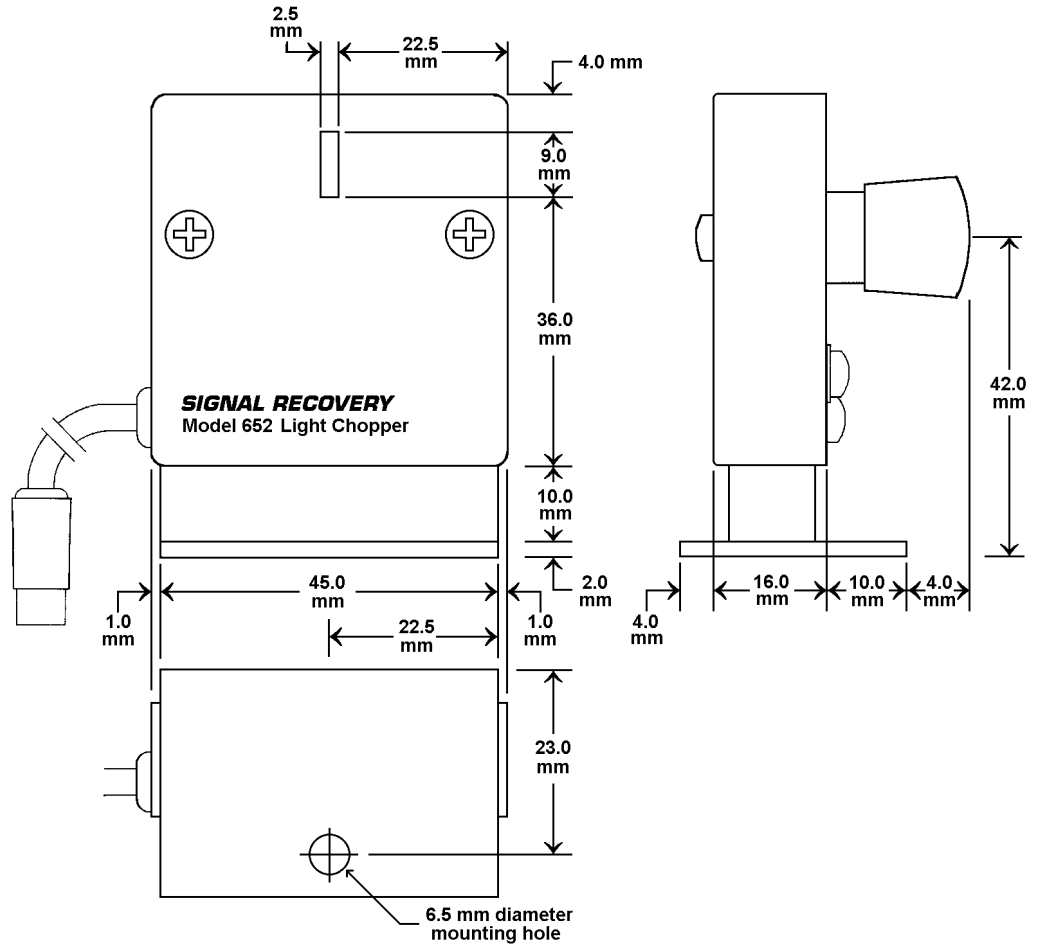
, Model 652-2 Chopper Head Mechanical Dimensions
